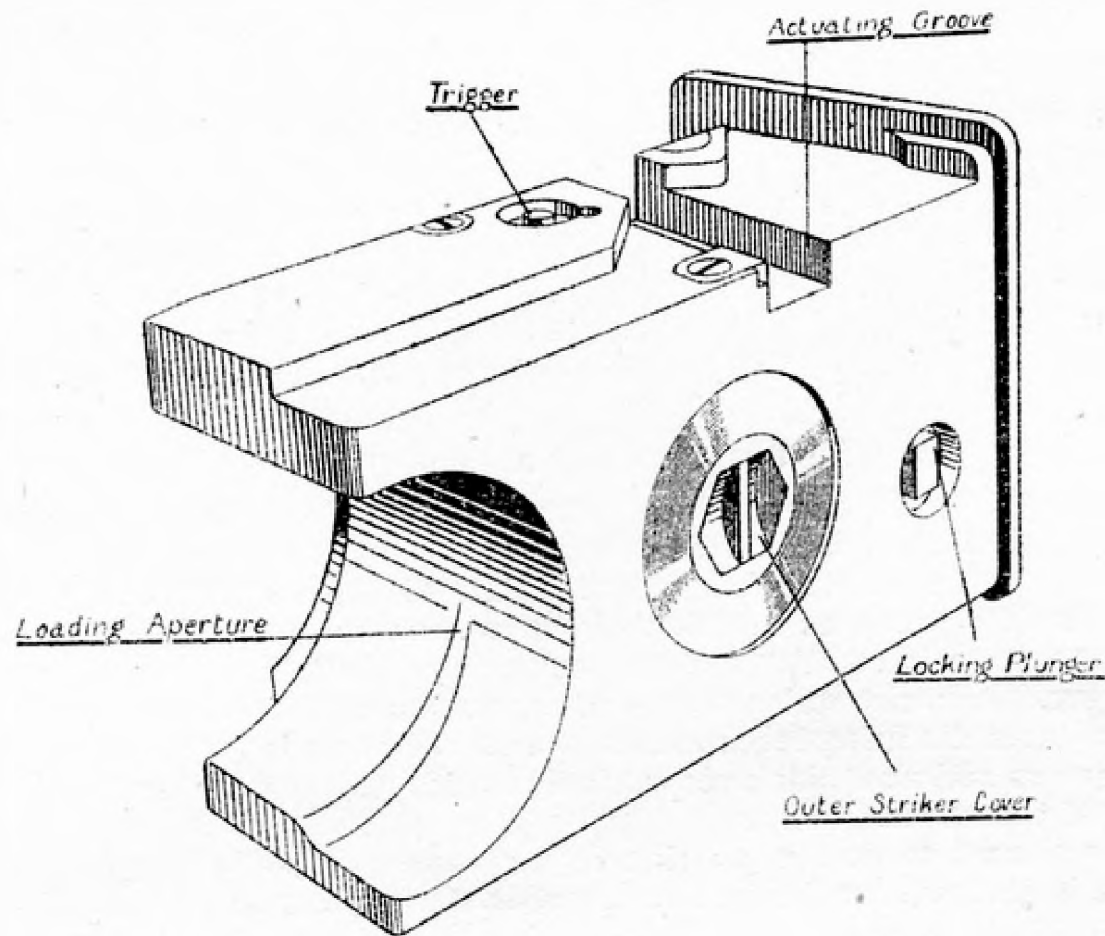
10.5 CM. (4.14 IN.) GUN-HOWITZER (10.5 CM. 1.F.H.18). BREECH BLOCK
